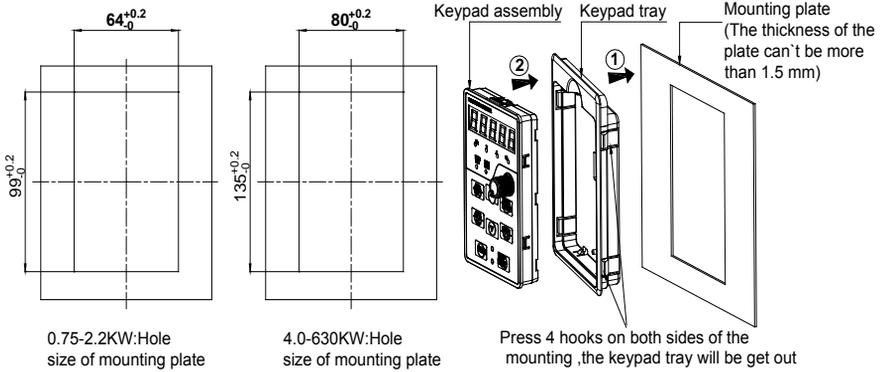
0.75~630KW External keyboard installation hole size diagram
